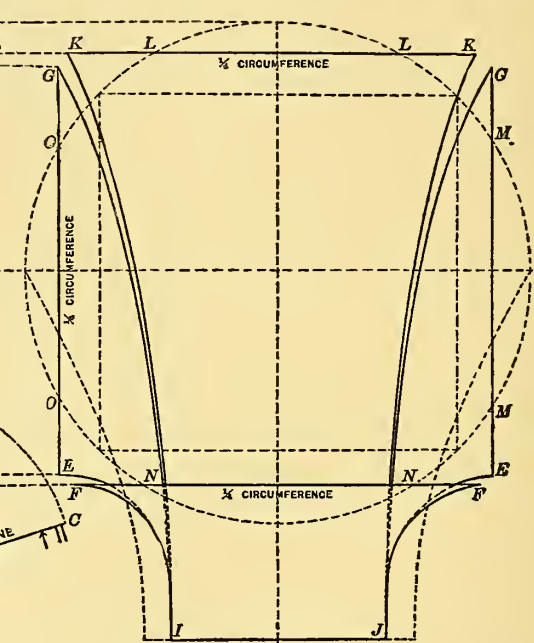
FRONT VIEW OF COWL, SHOWING THE WORKING POINTS IN THE PATTERN SHEET.
